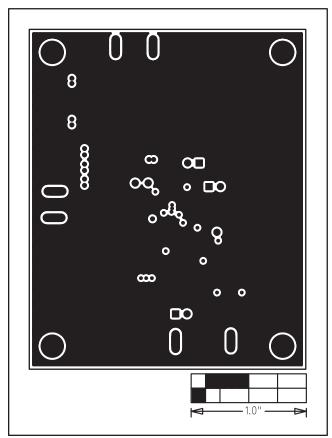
MAX16812 EV Kit PCB Layout—GND Layer 2
